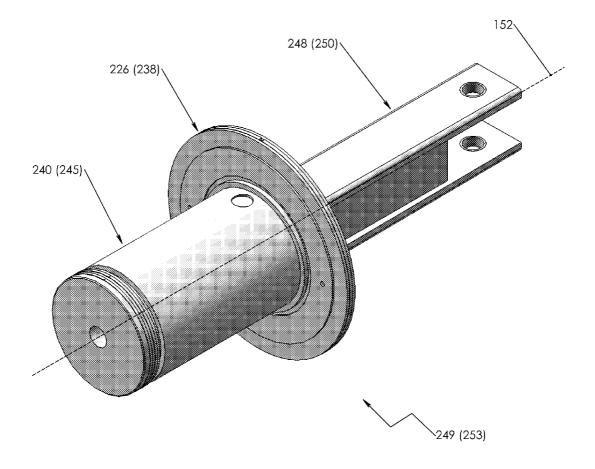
HYDRAULIC PISTON ASSEMBLY
